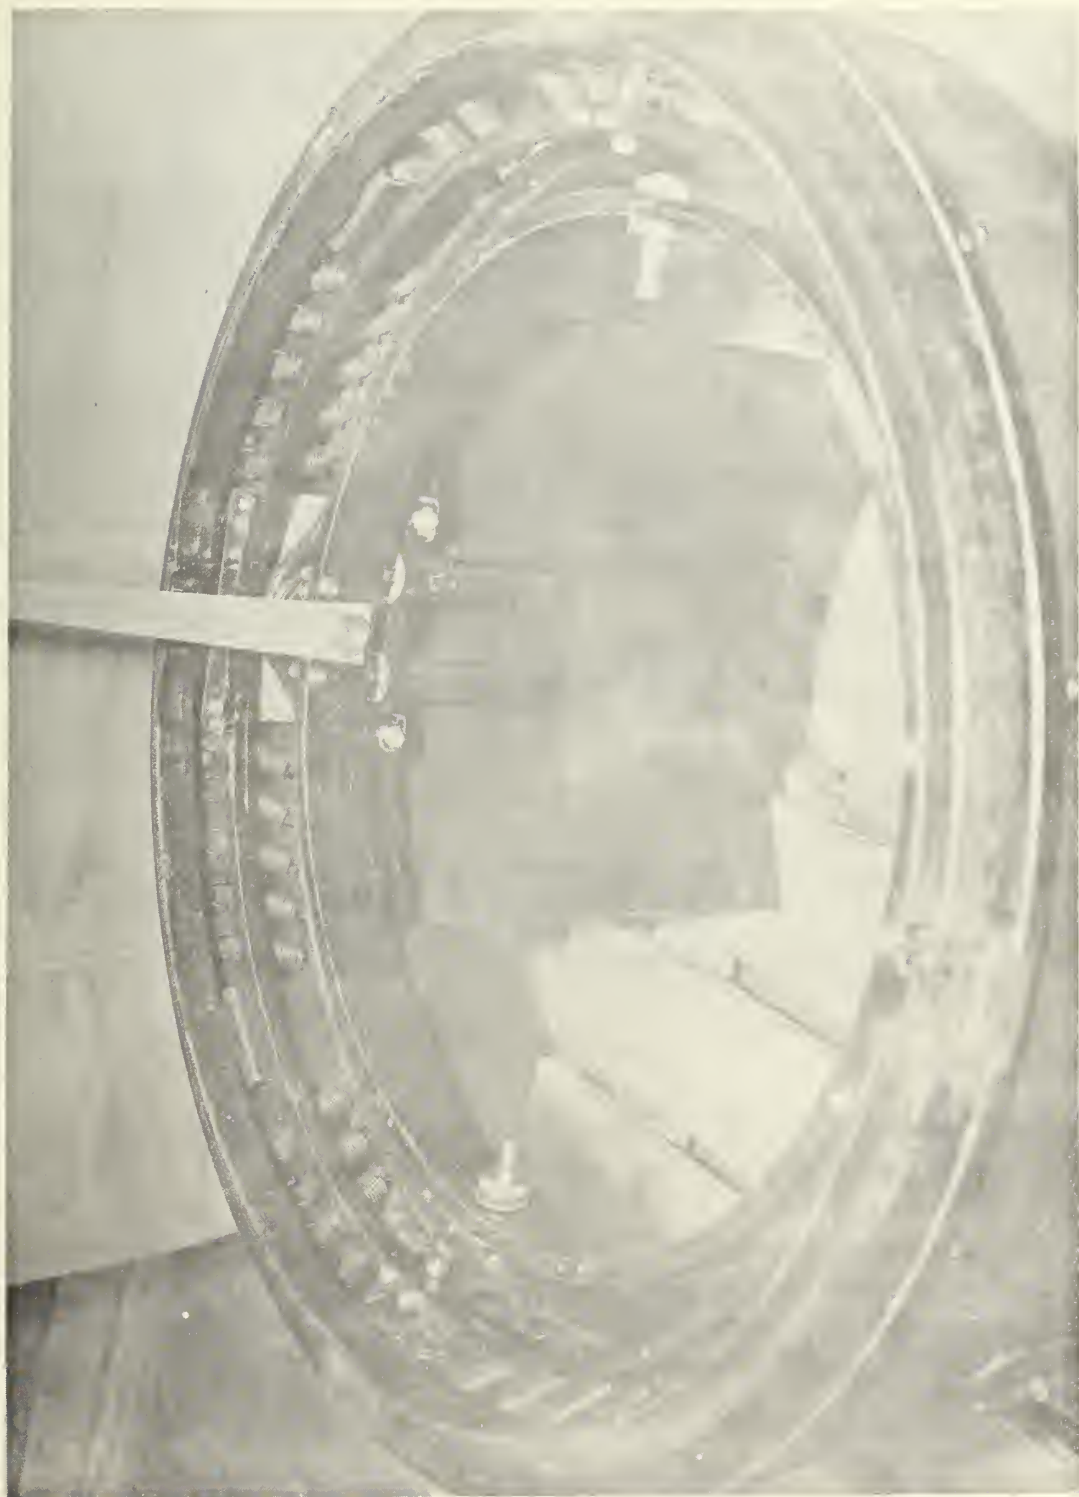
Upper Assembly Component With Outer Gimbal and Supporting Springs, and Outer Gimbal dash pots
